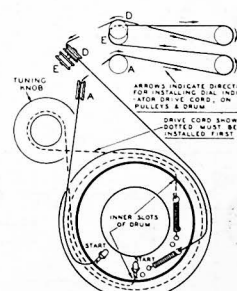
DIAL POINTER AND CABLE ARRANGEMENT
